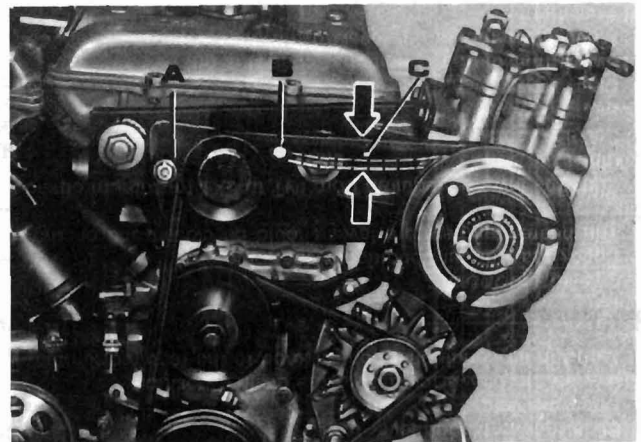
Compressor drivebelt tensioning (Sec 18)
